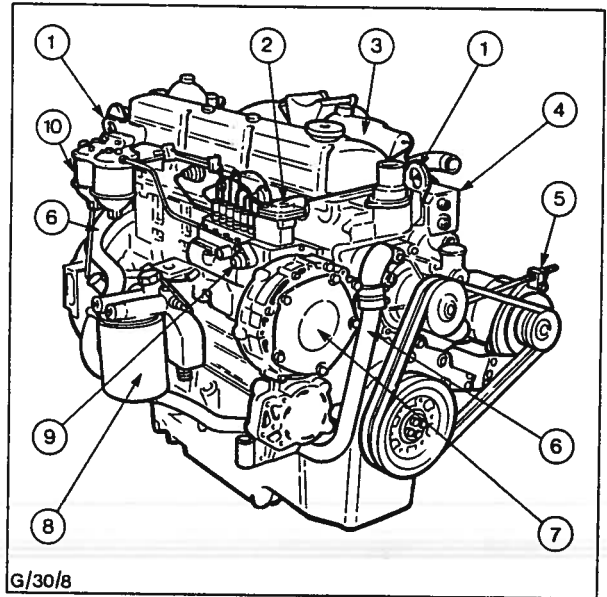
6 Cylinder Intercooled Marine Engine
